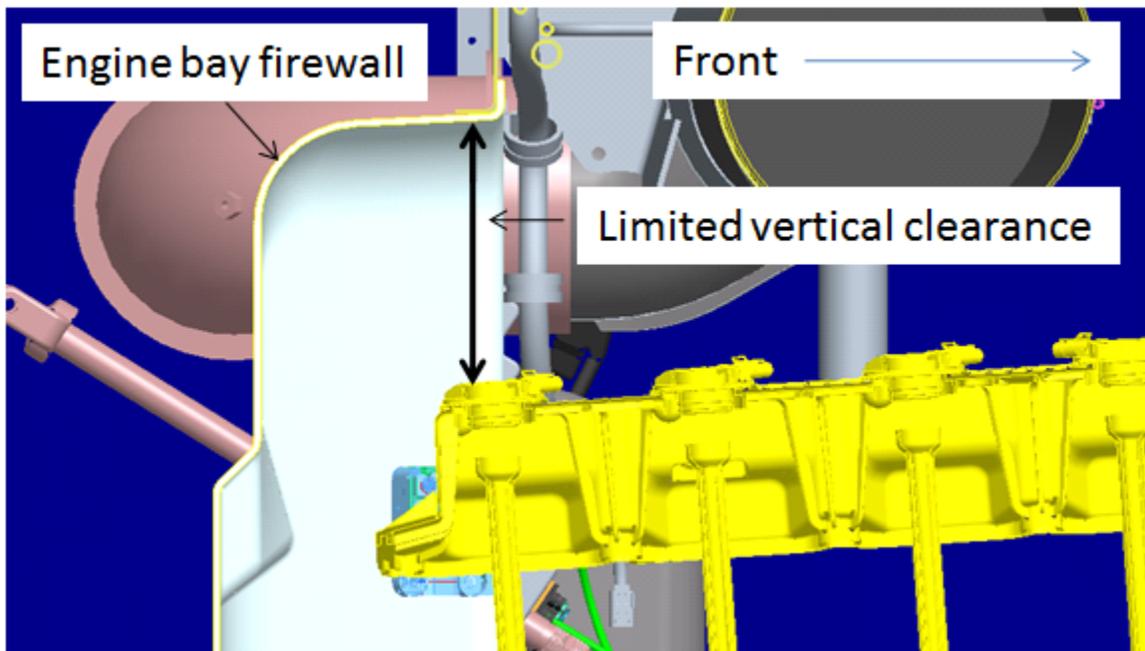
Ignition Coils and Extensions Mounted to Valve Cover
